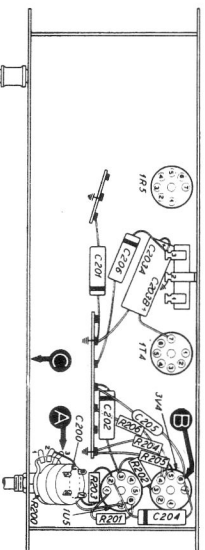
Bottom View, Showing Section 2 Test Points TP-5554B
